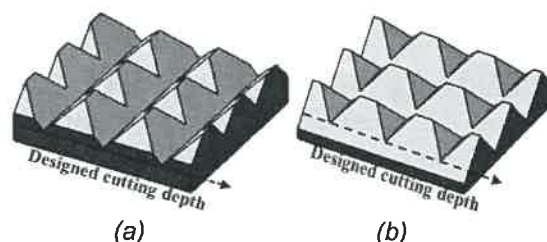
Examples of machining errors of machining pyramid patterns.
